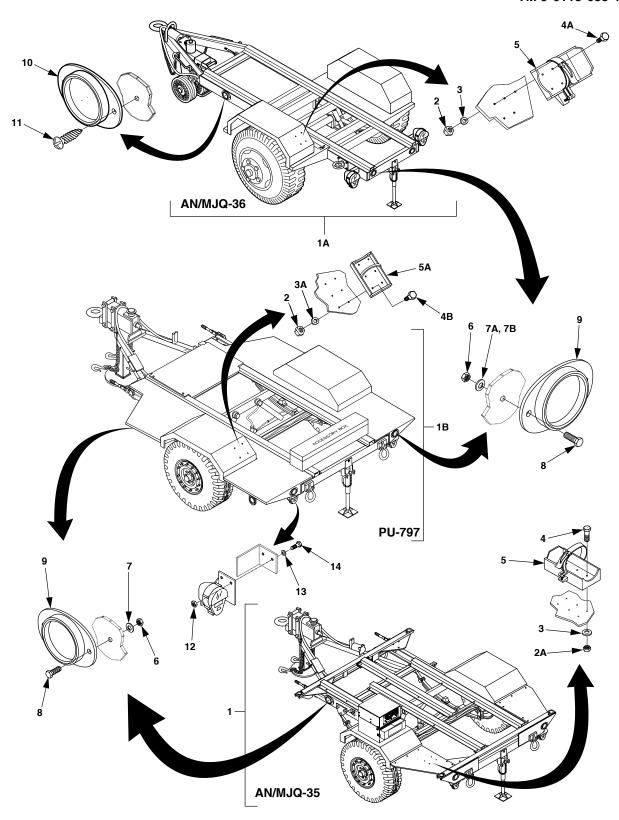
Power Plant/Power Unit Trailer Assembly (Sheet 1 of 2).
